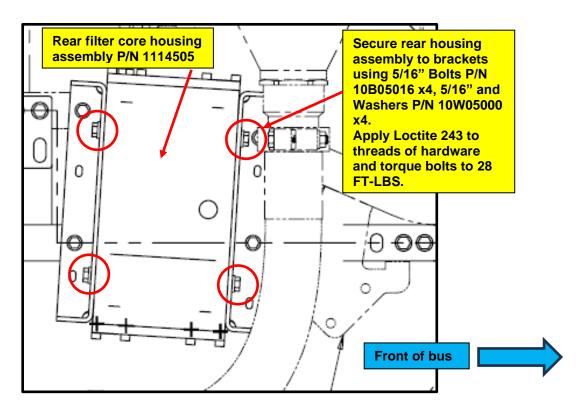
Top down view in rear inverter rack - Install rear filter core housing assembly
